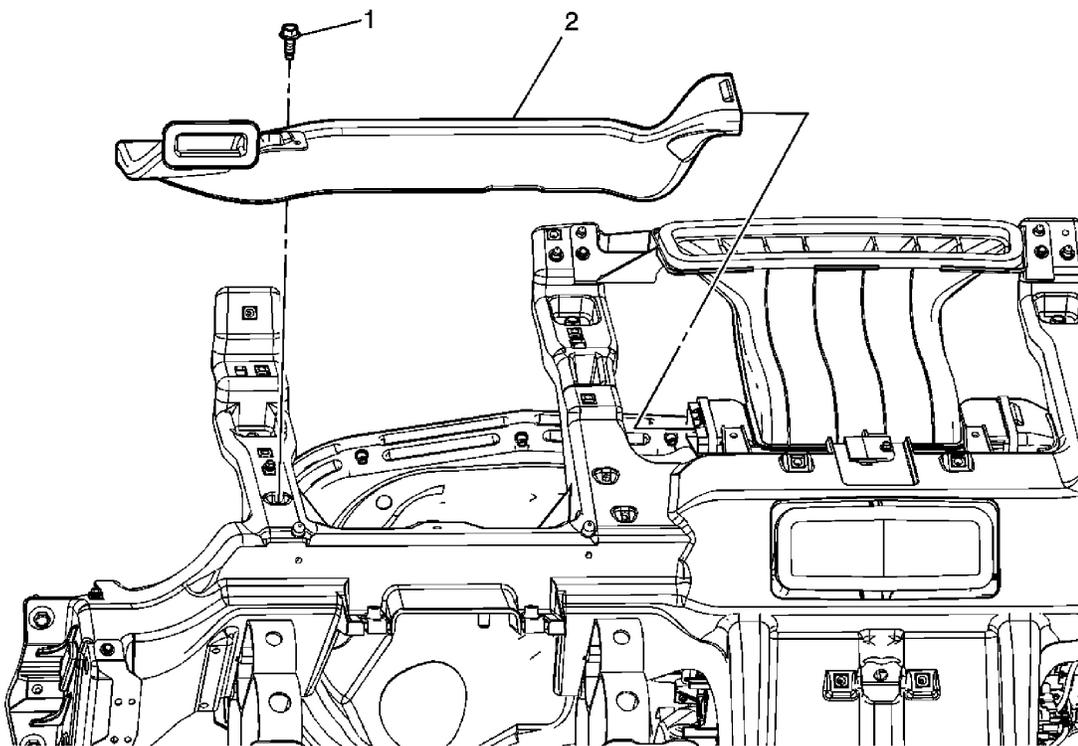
View Of Side Window Defogger Outlet Duct - Left Side
